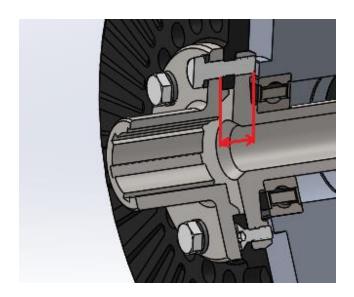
FSI SHAFT; bolt for FSI+SS shaft
